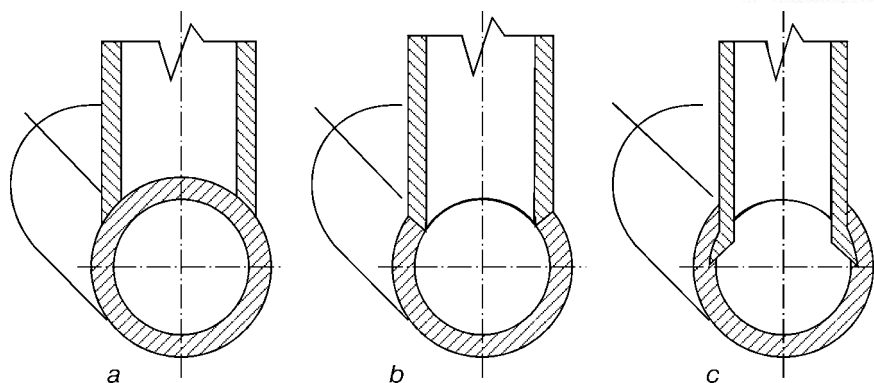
Designs of the T-joints made by the braze welding technology: *a* — by forming an external flange; *b* — with a conical shape of the external flange; *c* — by forming an internal flange
